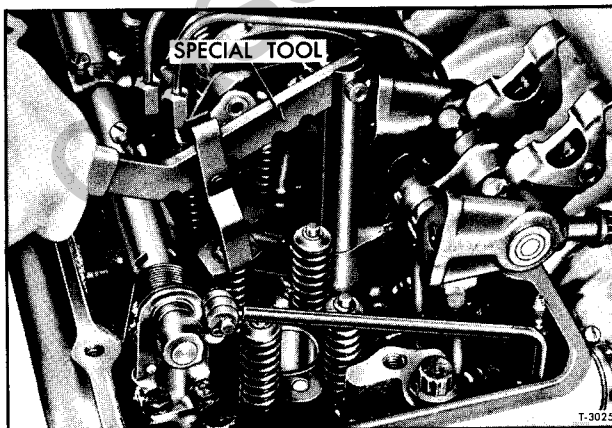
Use of Special Tool for Removing Valve Spring with Cylinder Head Installed
